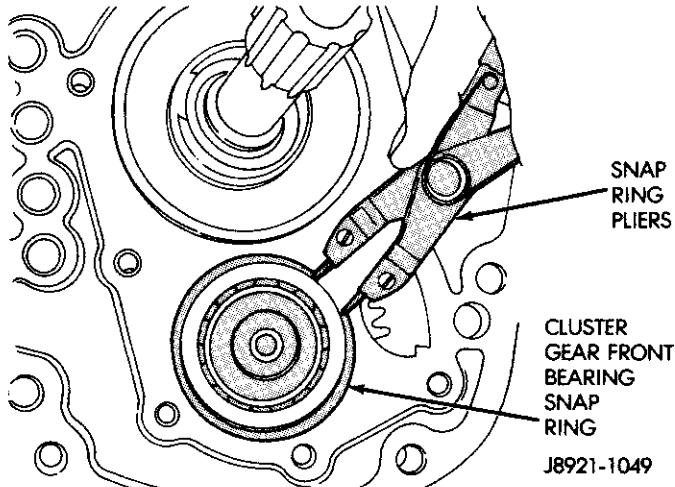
Removing Cluster Gear Front Bearing Snap Ring
